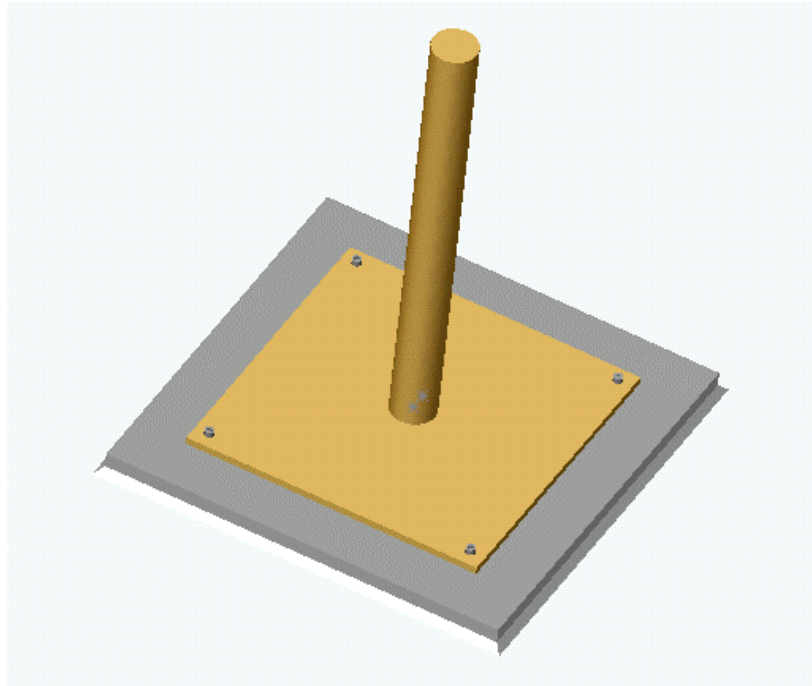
Non Magnetic Cassette Mounting Assembly
